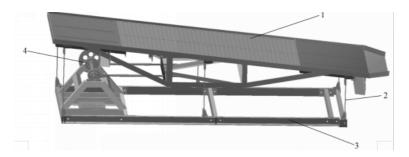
3D model drawing of the vibration motor; 1: frame; 2: spring plate; 3: base; 4: transmission parts
